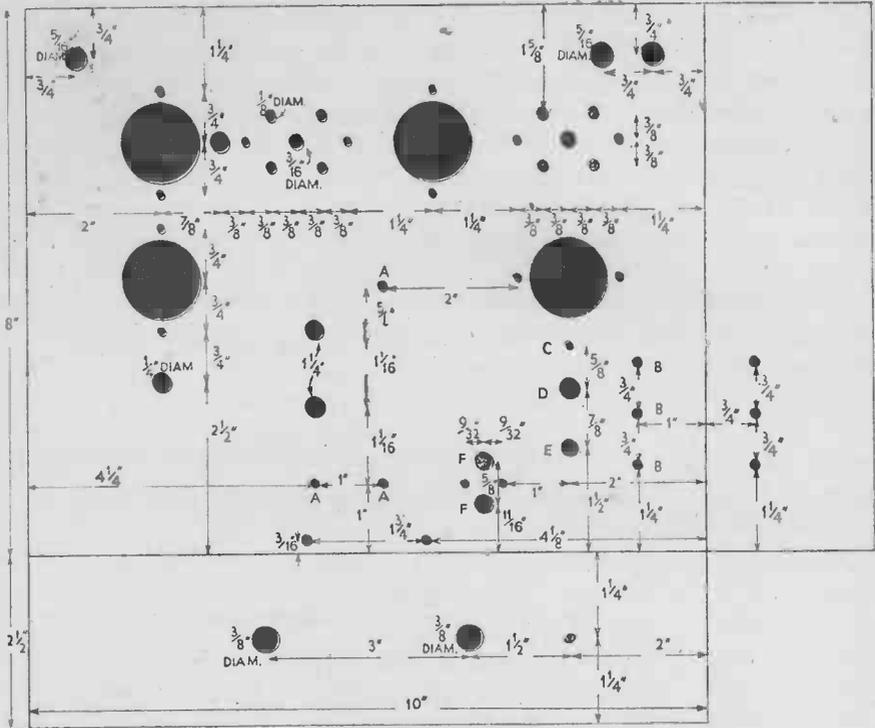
THE BATTERY SUPERHET CHASSIS, TOP VIEW
